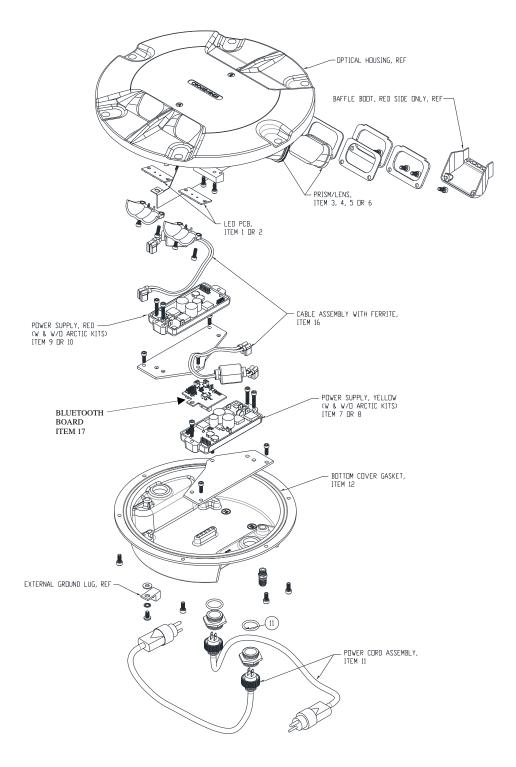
A: Light Unit Exploded View, two color Configuration Shown
